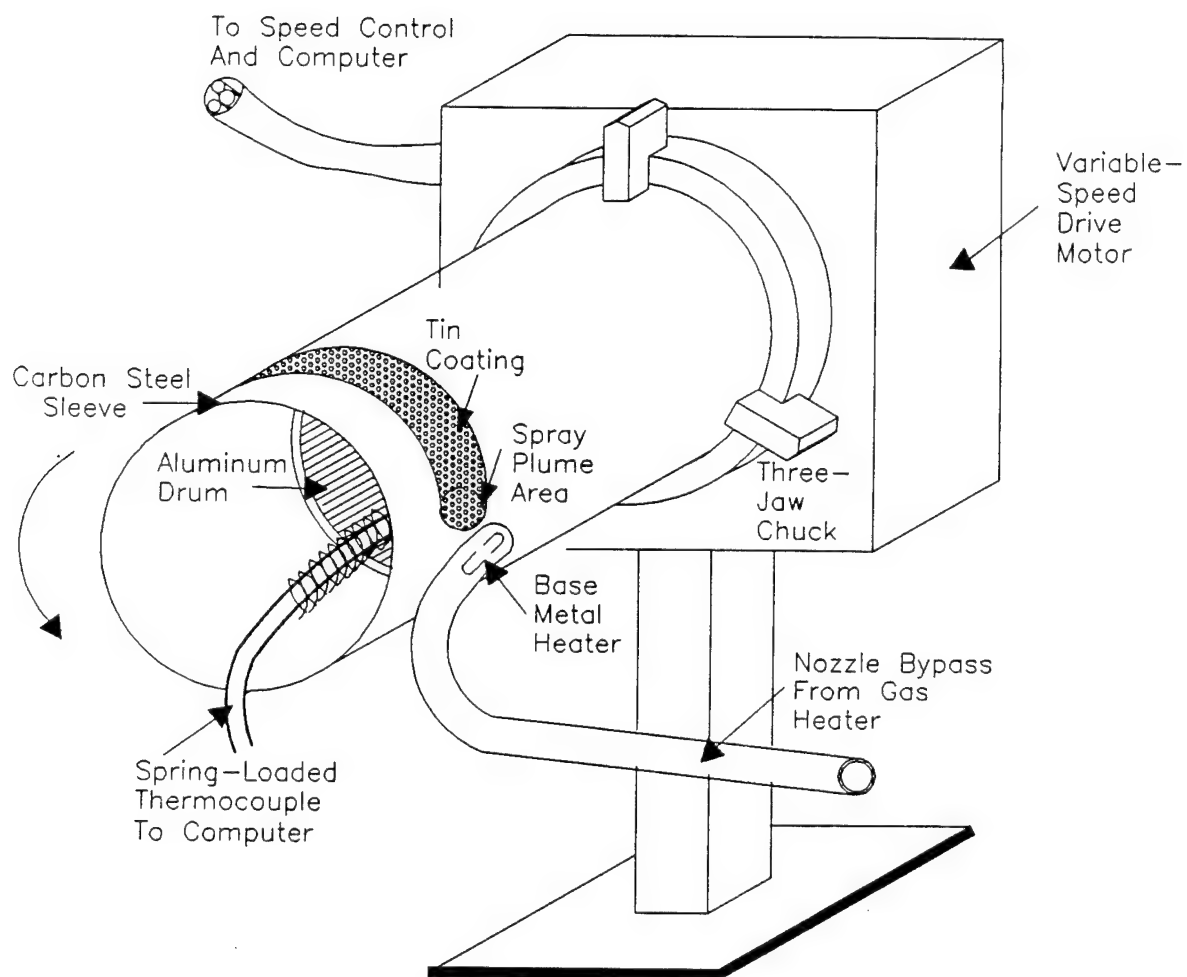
Fixture for Rotating Base Metal Sleeves to Form Tin Coatings on Low Carbon Steel.
